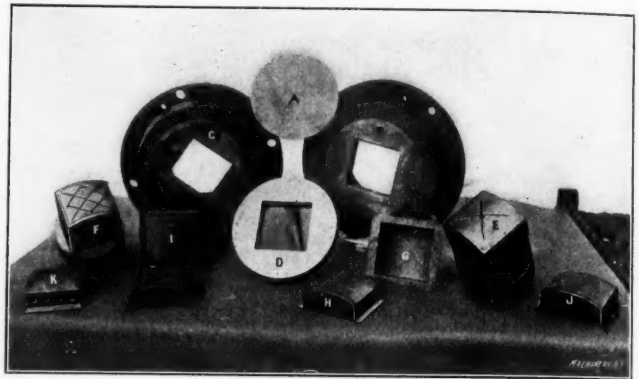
Punches and Dies for Rectangular Lamp-hoods and the Stock Before and After the Drawing Operations
